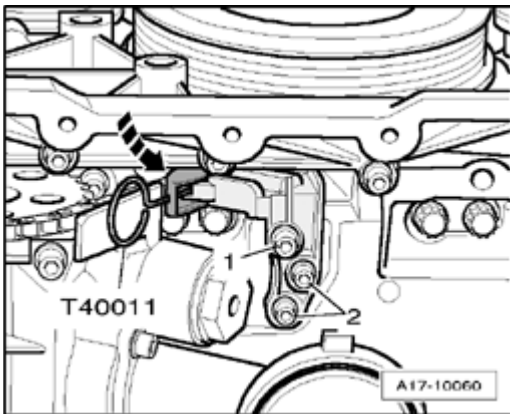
Pressing Chain Tensioner And Securing With Locking Pin T40011
